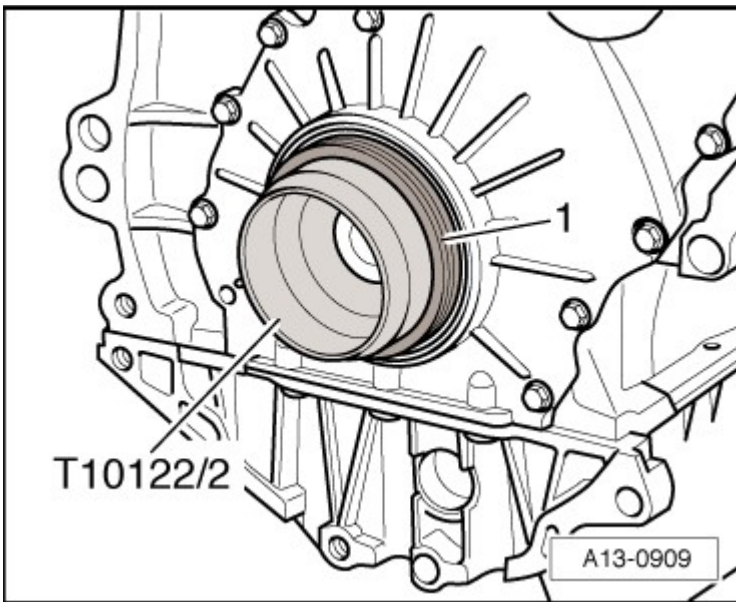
Inserting Guide Sleeve T10122/2 With Oil Seal Onto Crankshaft
